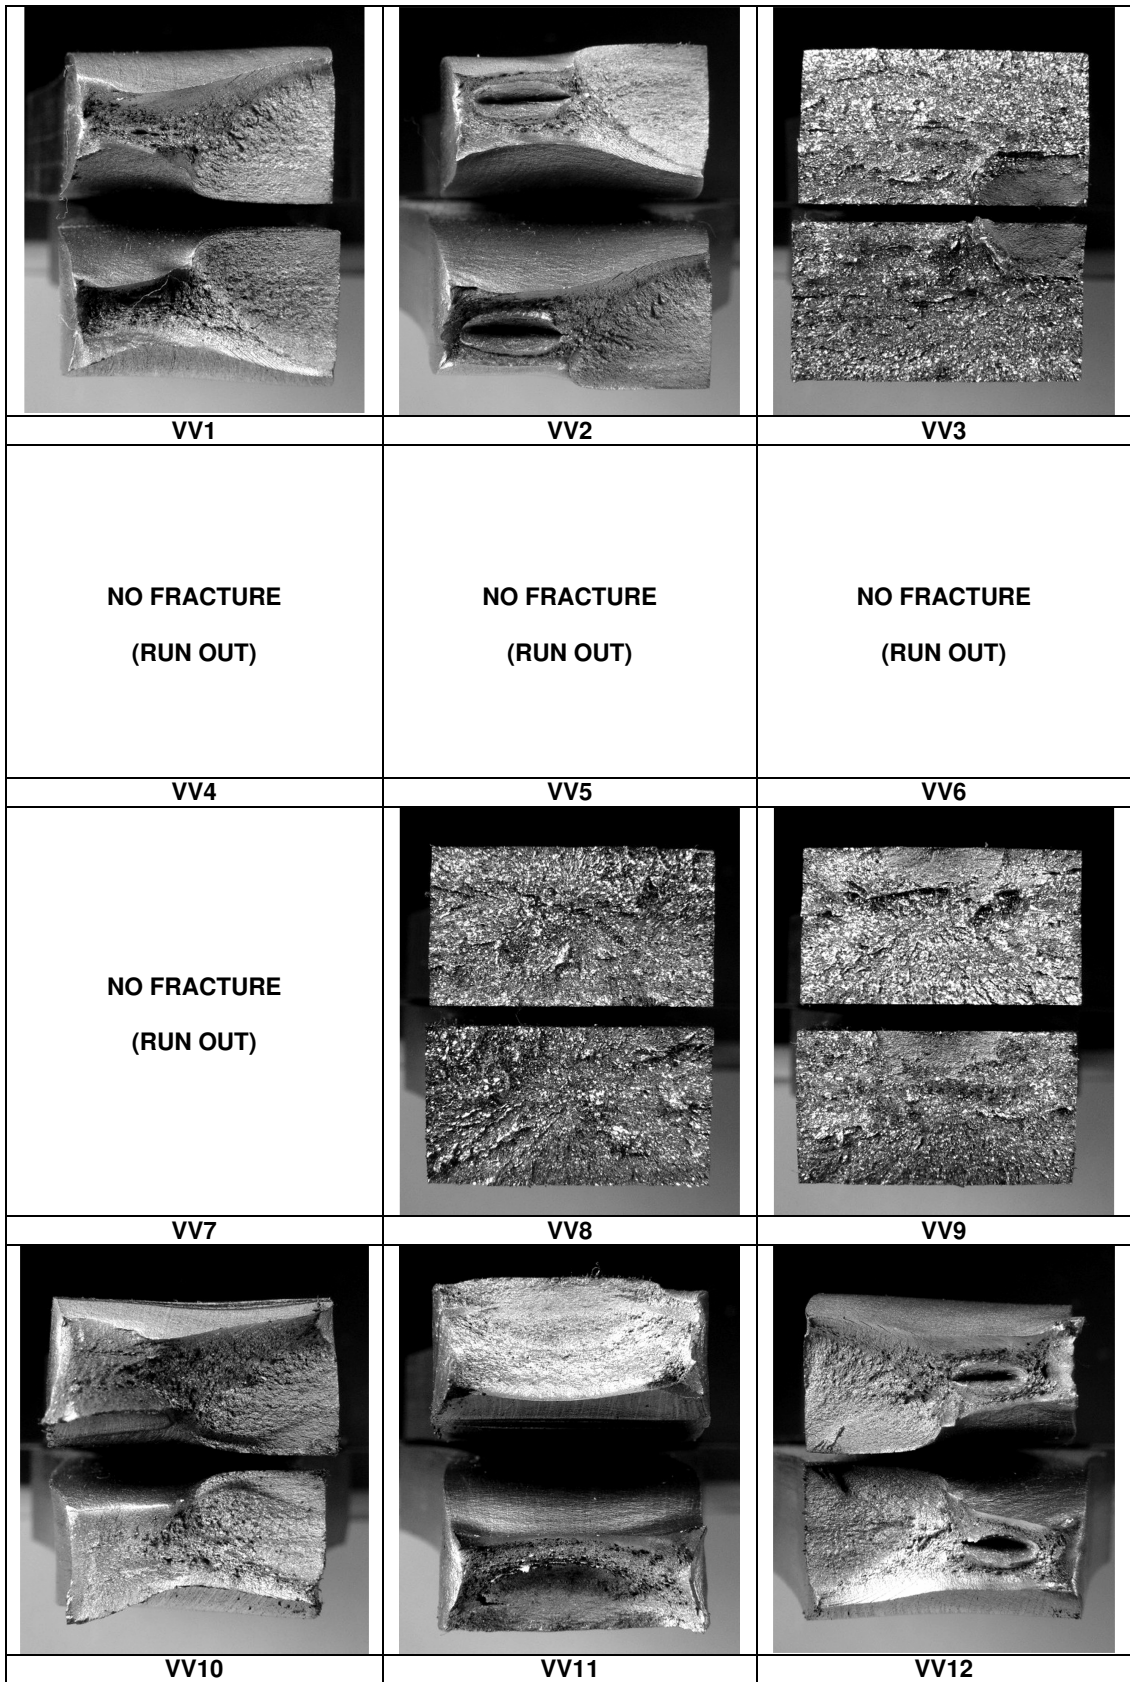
Fatigue fractographs of samples from 12 mm thick LASER weld (V).
